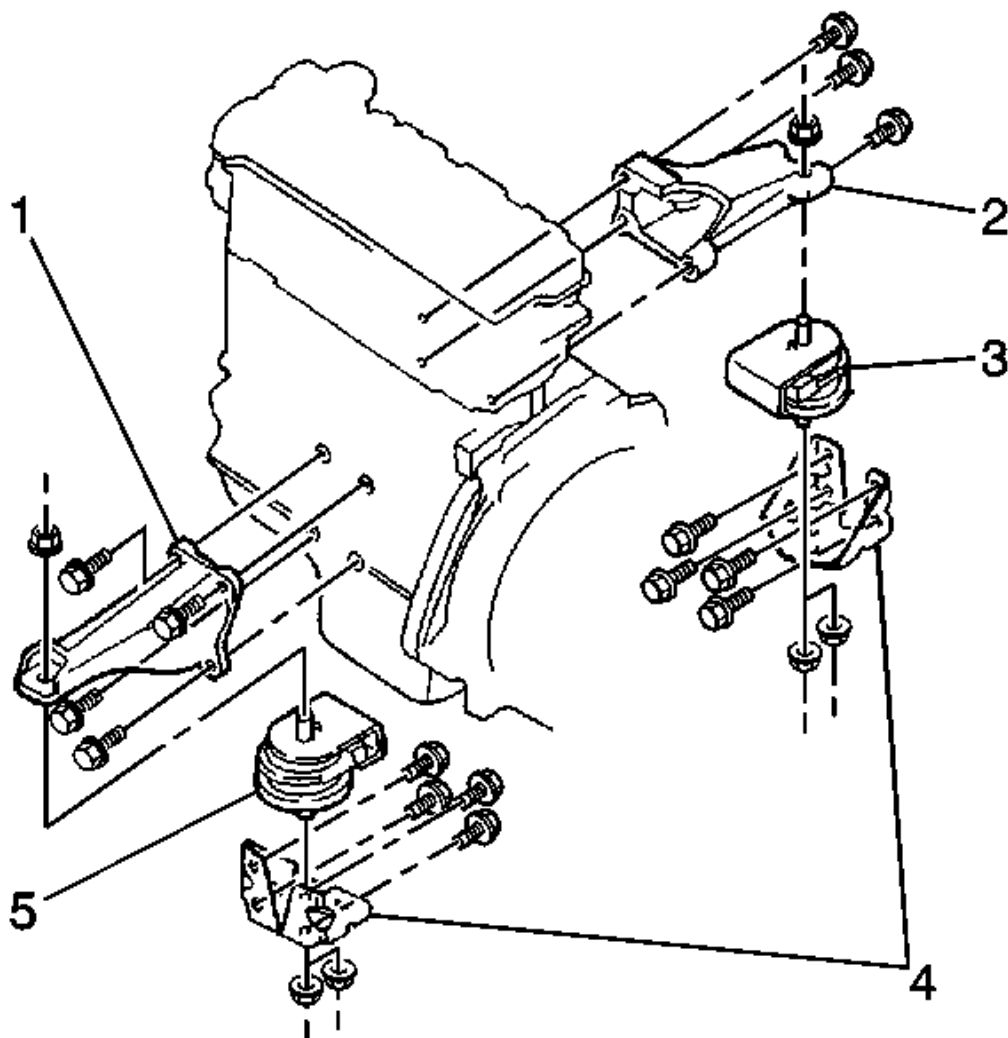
View Of Left Side Engine Mount, Block Bracket & Body Mount Bracket
